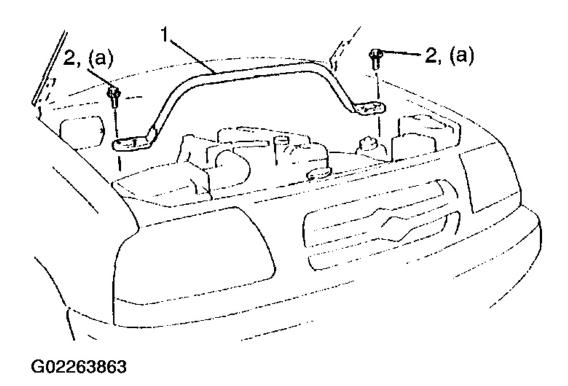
Installing Strut Tower Bar Courtesy of SUZUKI OF AMERICA CORP.
